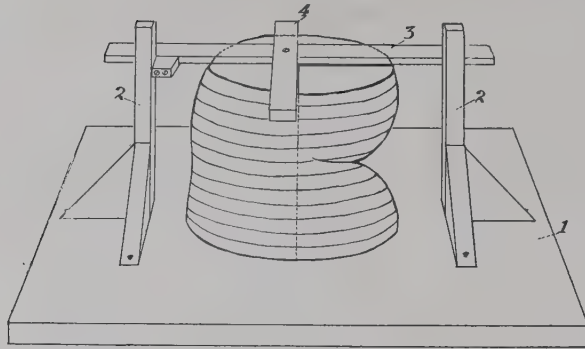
Method of making guide lines: 1, baseboard; 2, perpendicular posts; 3, straight edge; 4, piece at right angles to it.
